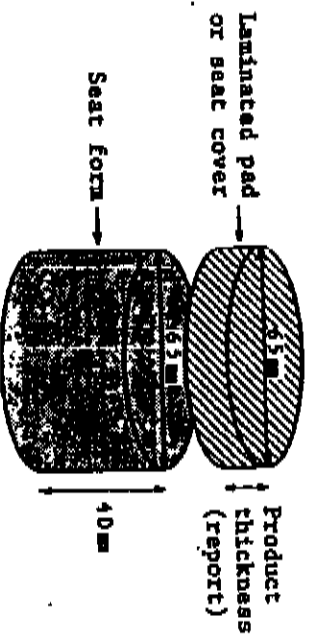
Test Piece Dimensions for Composite Material (Seat)
